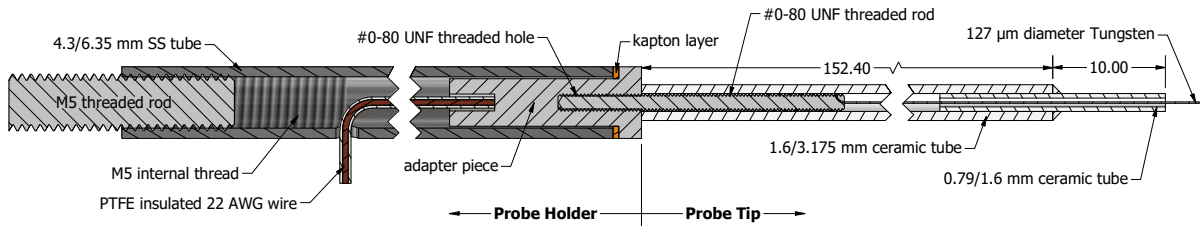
Schematic of the in-house design of the Langmuir probe assembly consisting of a probe holder and an interchangeable probe tip.
